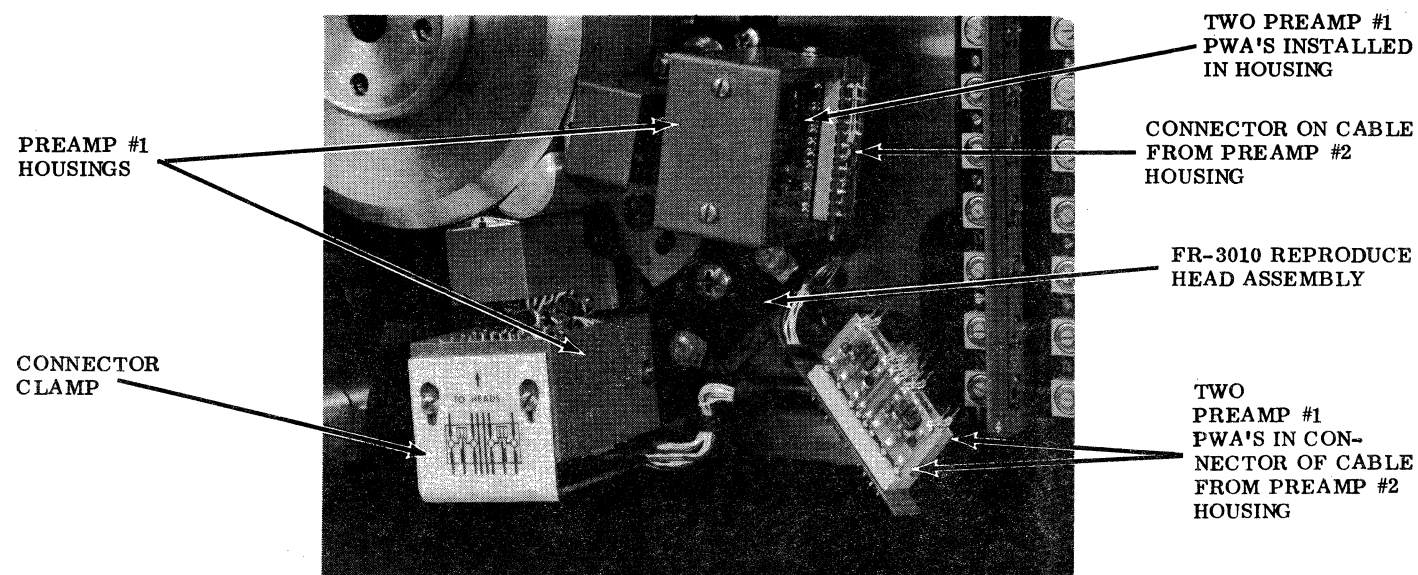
Preamplifiers #1 Unplugged for Head Assembly Removal
